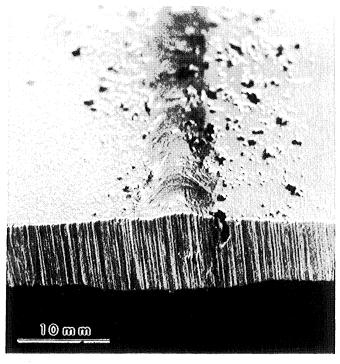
Cleaned and sectioned circumferential weld in AL-6XN. Lack of mixing weld filler metal resulted in deep pitting. Corrosion product deposits also caused secondary base metal pitting.
